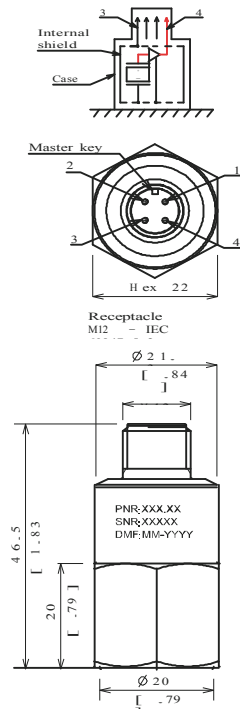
Outline drawing & Electrical layout, B=1 (MIL-C-5015)
